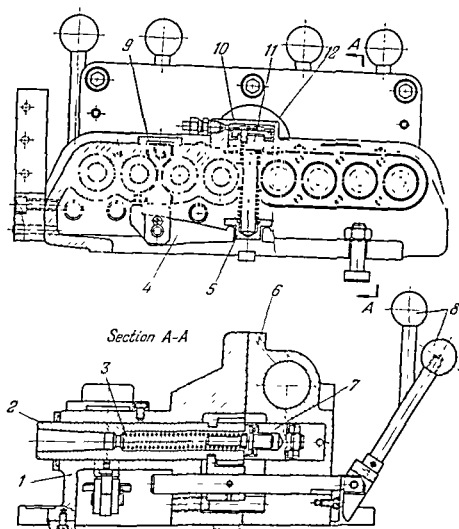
Headstock of the model 6B 1M semiautomatic milling machine
